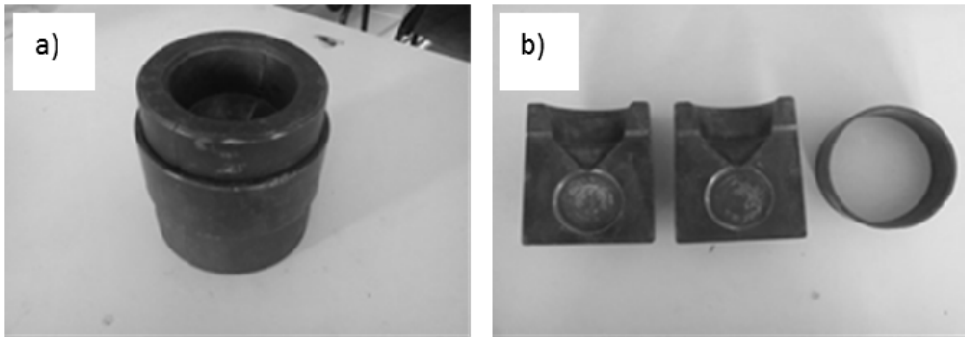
Mold for coin test pieces before casting (a) and dismantled (b)
